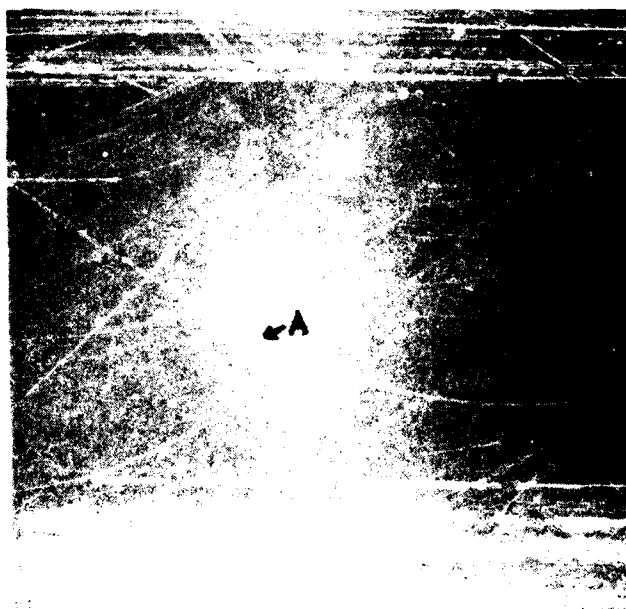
SURFACE DEFECTS ON COMPONENTS OF AS-FINISHED NO. RA-103 TAPERED ROLLER BEARING
